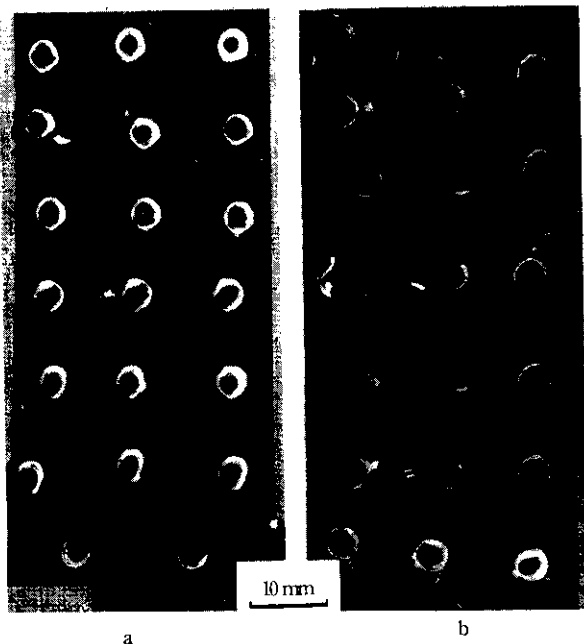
Appearance of spot welded joints after spray tests
